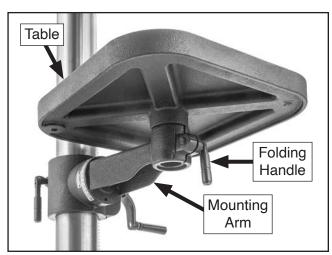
Table and table swivel lock handle installed (T33961 shown).
